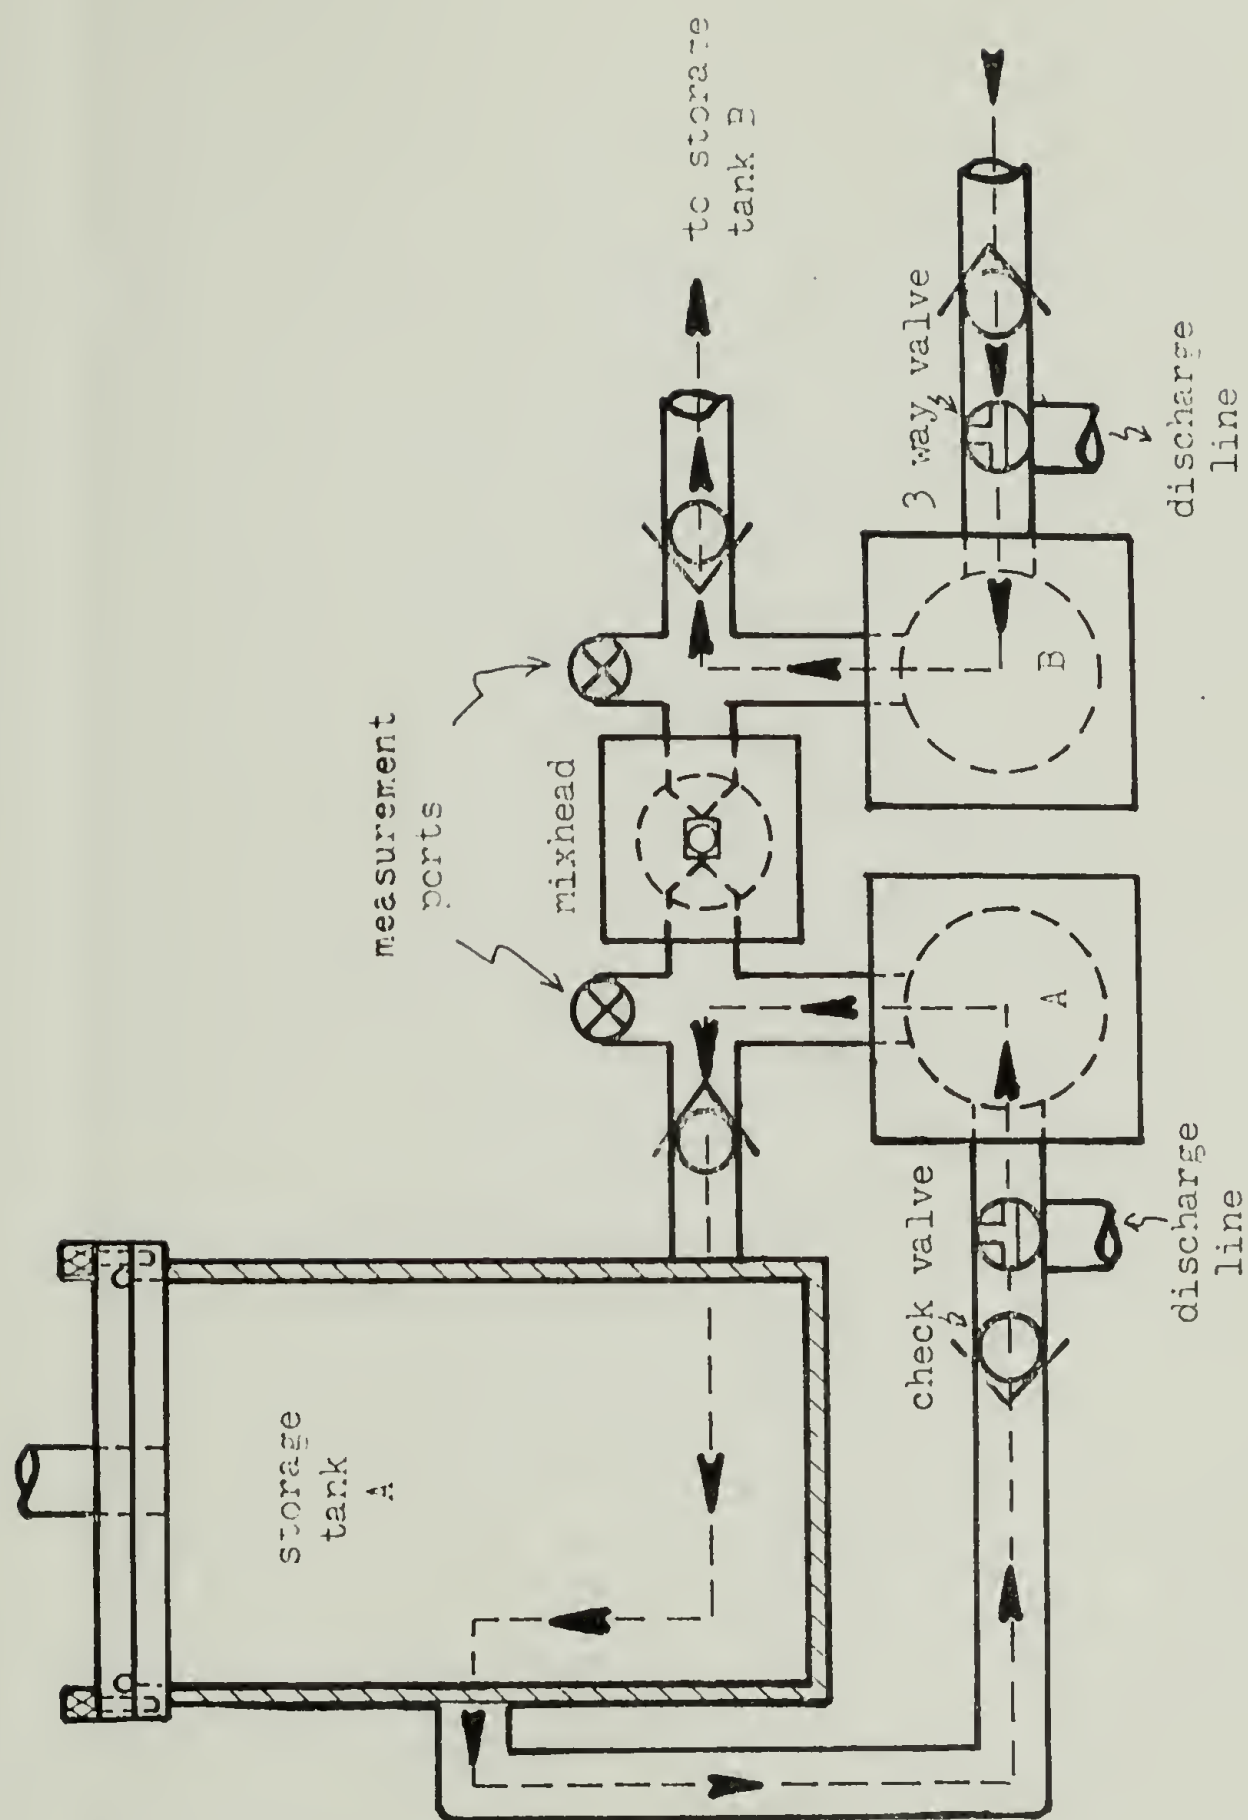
Schematic front view of RIM machine and reactant circulation path (Lee61).
